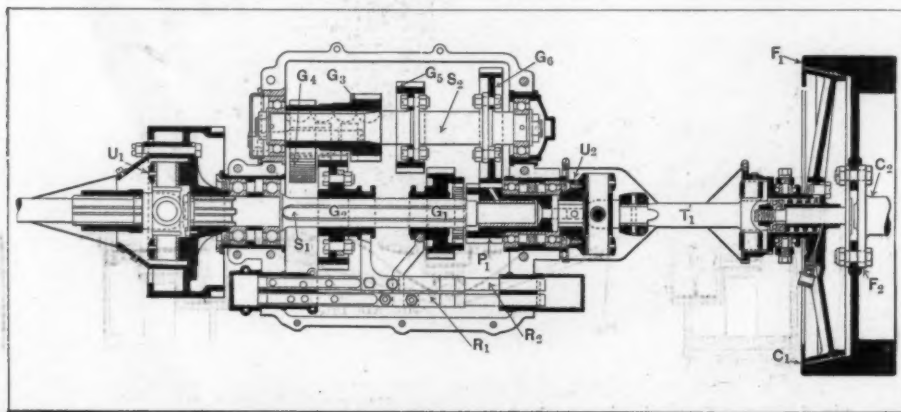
Section of the transmission gear system showing the relation of the prime to the lay shaft, the mountings of annular type ball bearings and the scheme of direct drive.
